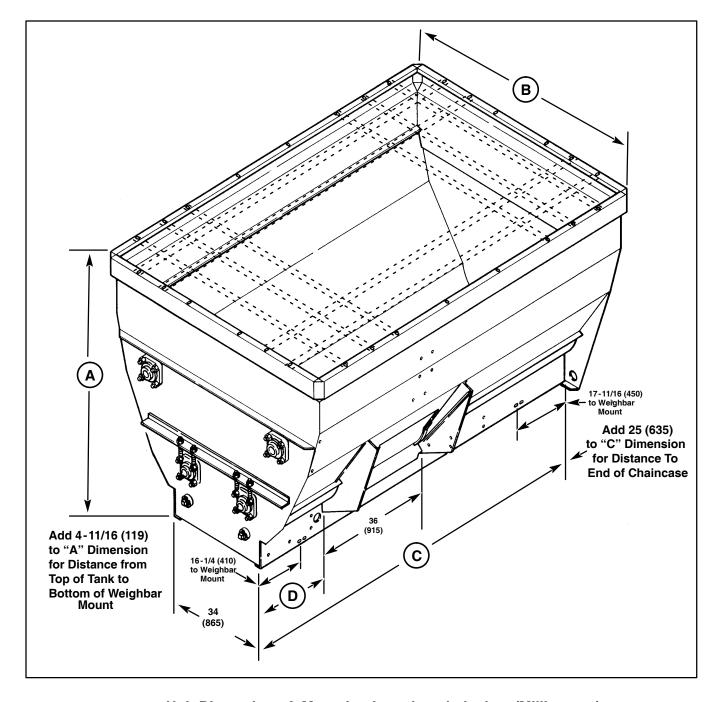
Unit Dimensions & Mounting Locations in Inches (Millimeters)
